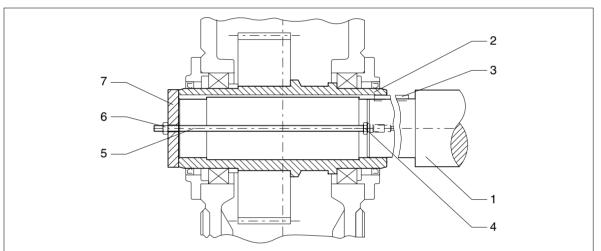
Hollow shaft with parallel keyway, mounting with threaded spindle
